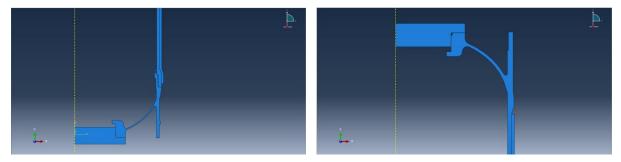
Assembly of top Dome, cap & composite Fig. 7 Assembly of Bottom dome, Cap
